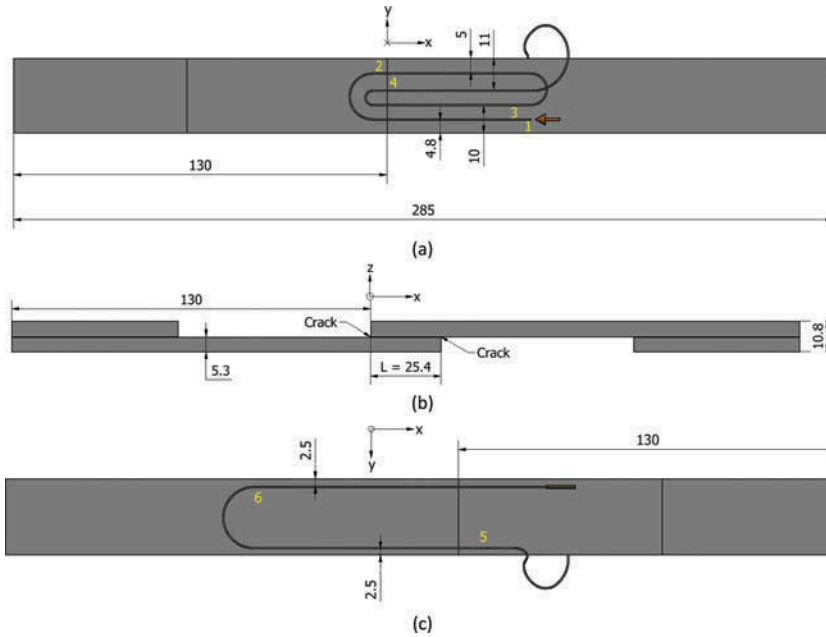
Drawing and dimensions of the tested specimen, with a schematic view of the position of the optical fibre segments used for strain measurement (dimensions in mm): a) top view; b) lateral view; c) bottom view.
